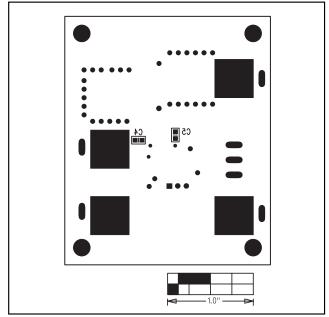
MAX8536 EV Kit Component Placement Guide—Solder Side
